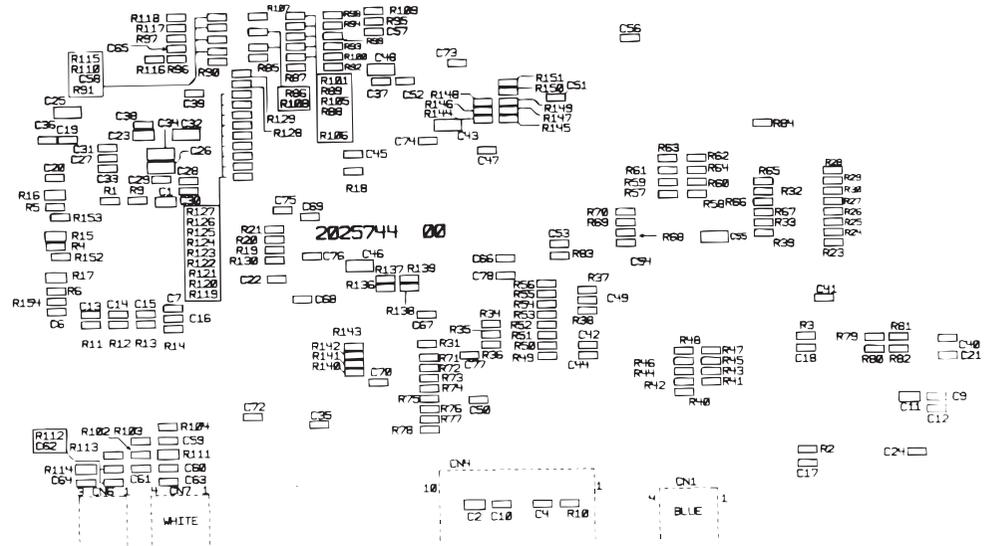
B063MAIN Board Component Layout (Soldered Side)
